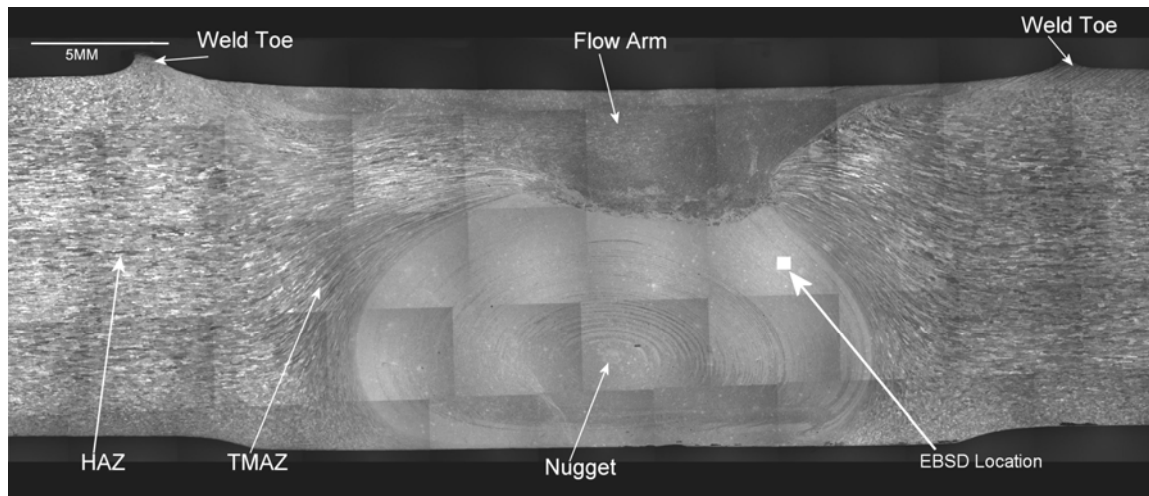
Optical macrograph of friction stir welded 13mm gauge 2024-T351 plate (etched and viewed in crossed polarisers).
